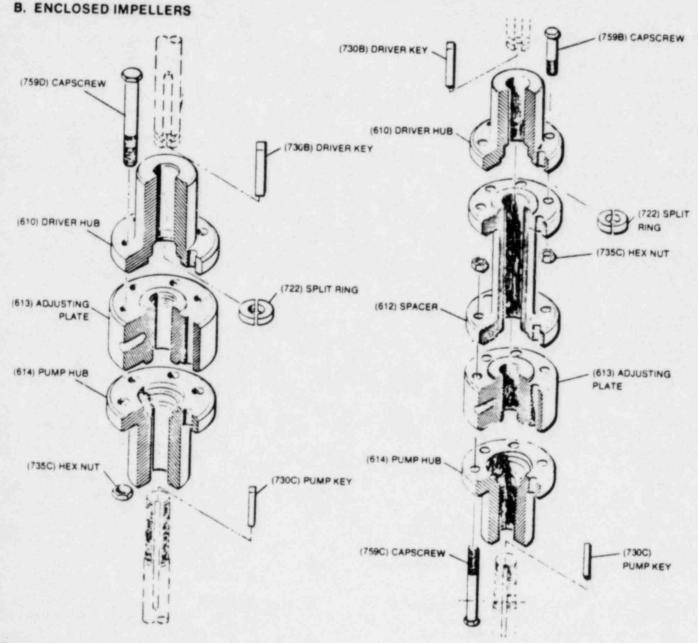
FLANGED ADJUSTABLE COUPLING
